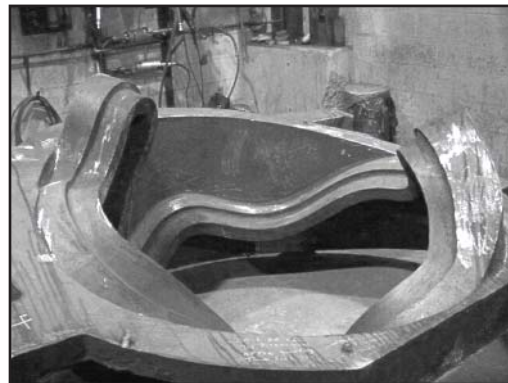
A prototype casting of an National Compact Stellarator Experiment modular coil winding form fabricated by Energy Industries of Ohio, Inc.
